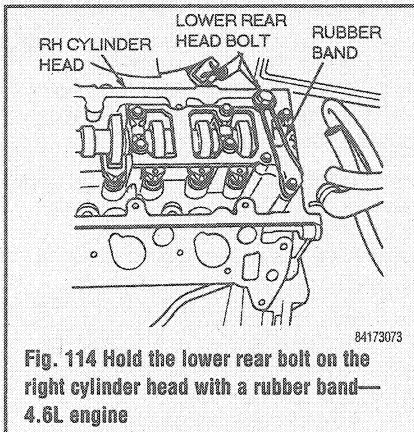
Hold the lower rear bolt on the right cylinder head with a rubber band—4.6L engine
